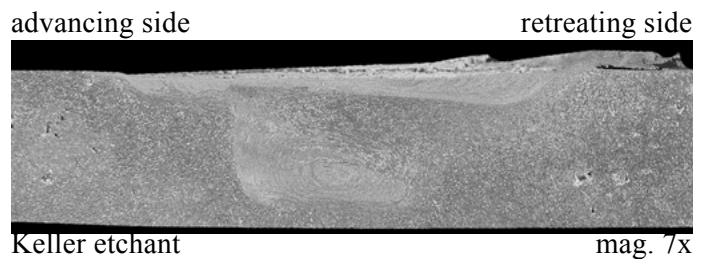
Macrostructure of the FSW weld made of casting aluminium alloy EN AC-43200. Welding parameters:  $V_n = 1300$  rev./min,  $V_z = 200$  mm/min
